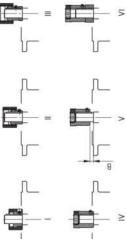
Fitting the coupling onto the motor shaft - various types of coupling
